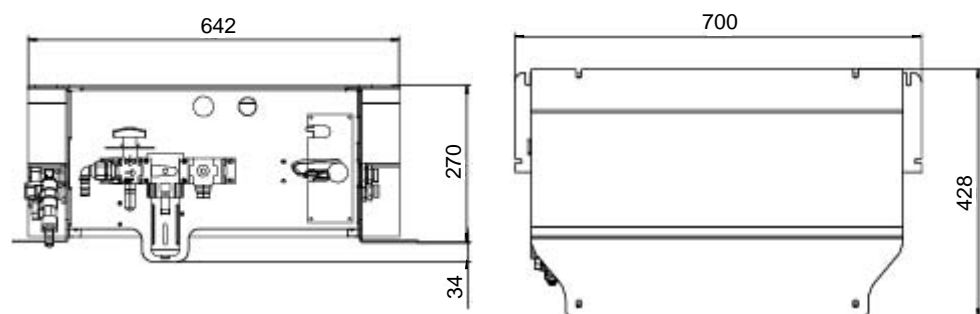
Water and air unit with outer dimensions, media connections, signal connection (dimensions in mm).
